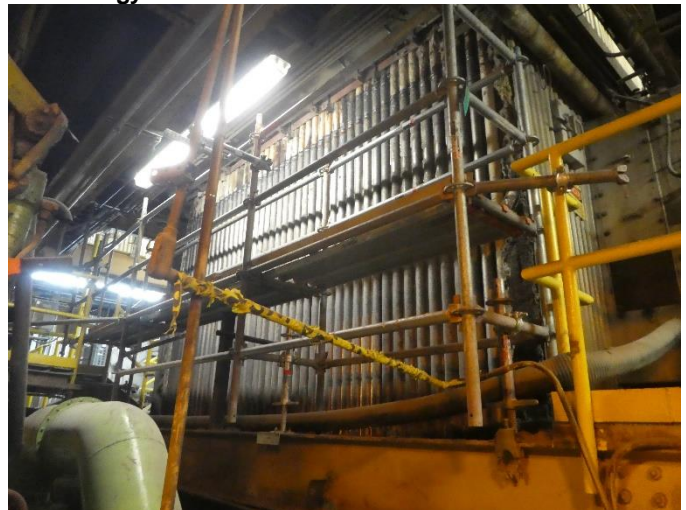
New boiler tube panels installed – bullnose and ignition roof replaced – Boiler No. 2 Outage
